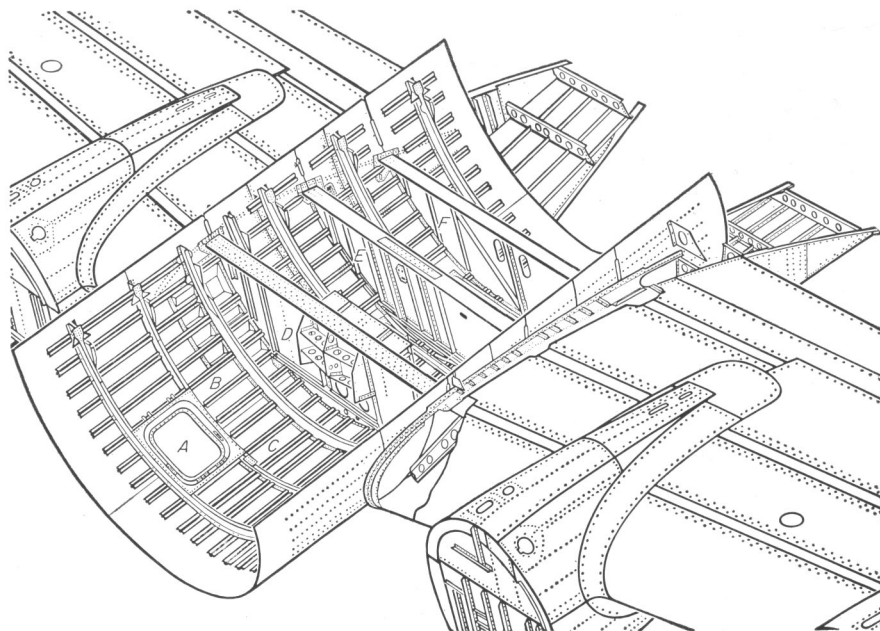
Cutaway view of the lower section of the C-54 fuselage, showing belly compartment access door (A); typical formers (B); stringers (C), and spars (D), (E), and (F) extending through the fuselage.
